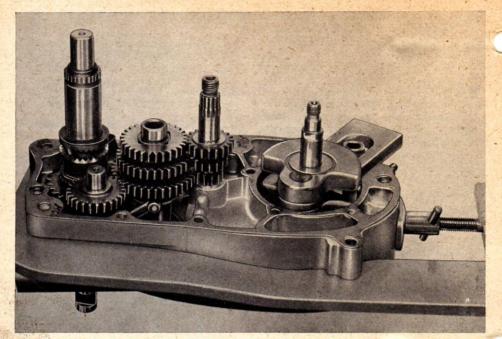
Complete gearbox reassembled in the left hand crankcase half-member
